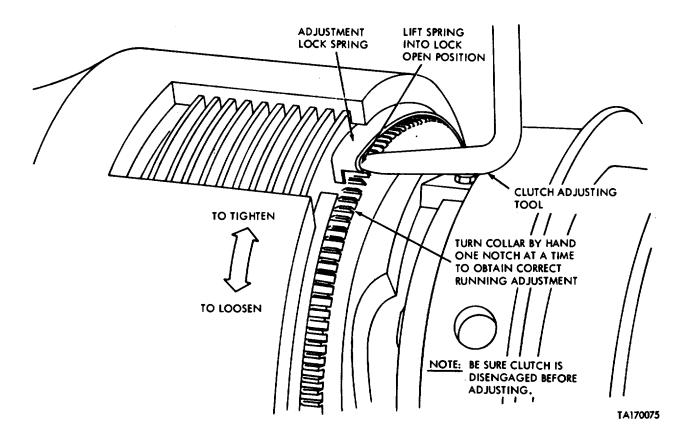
Mechanical clutch adjustment (early model bulldozer).
